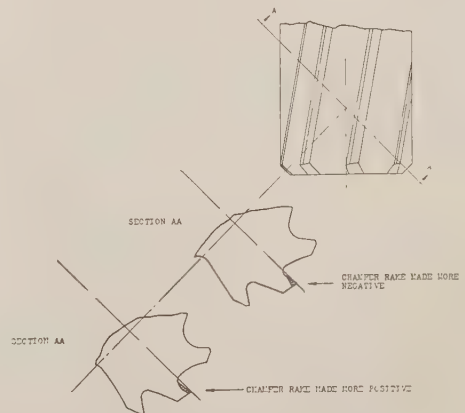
POSITIVE OR NEGATIVE RAKE MAY BE VARIED ON CUTTING EDGES OF CHAMFER
